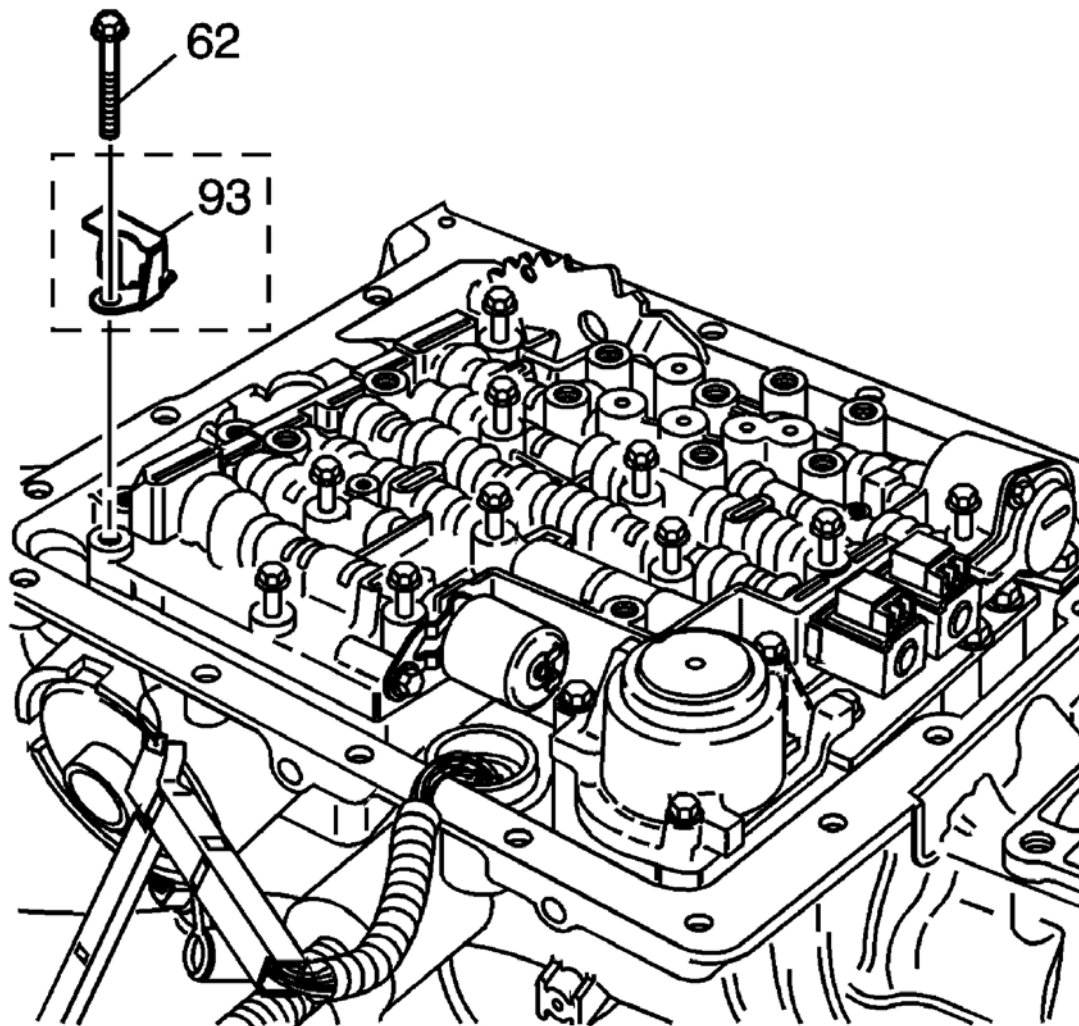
Locating Valve Body Bolts & Fluid Level Indicator Stop Bracket
